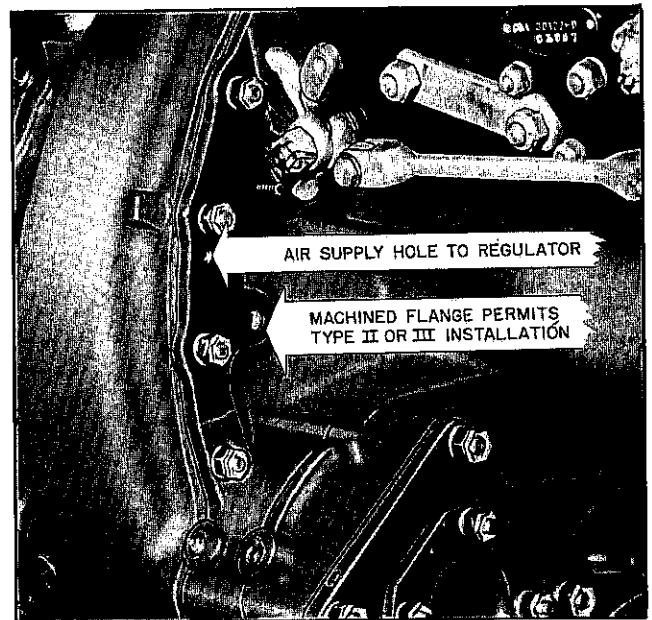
Supercharger Inlet Cover Flange which requires Type II or Type III Installation of Regulator.
